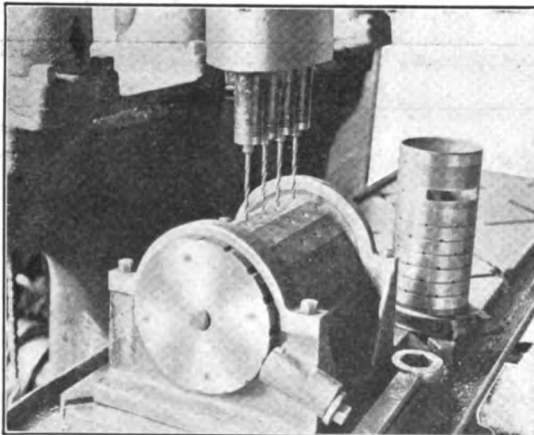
DRILLING OIL HOLES IN SLEEVE
